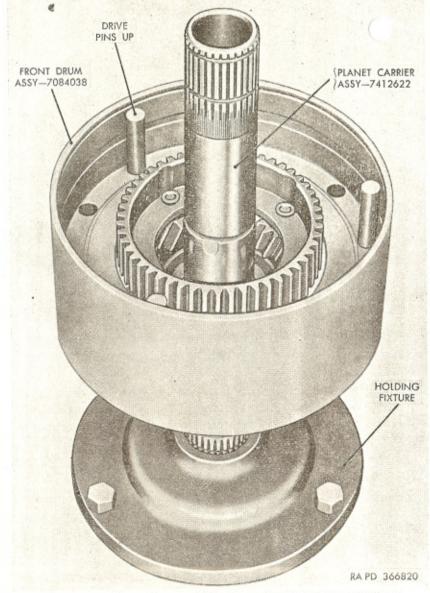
Front drum positioned on planet carrier to facilitate assembling front planetary unit.
